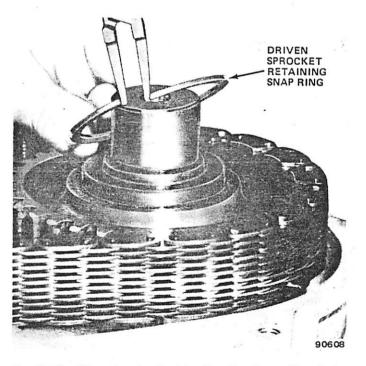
D-13 Driven Sprocket Retaining Snap Ring Removal/Installation
